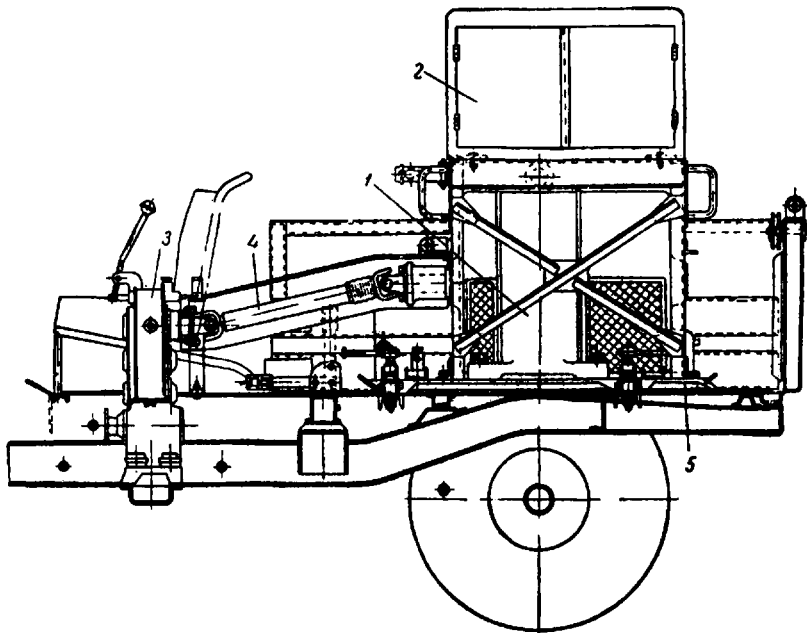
The body of the GAZ-69 vehicle with the PN-145 generator. 1—PN-145 generator; 2—block of contactors; 3—gearbox; 4—propeller shaft; 5—slides.
